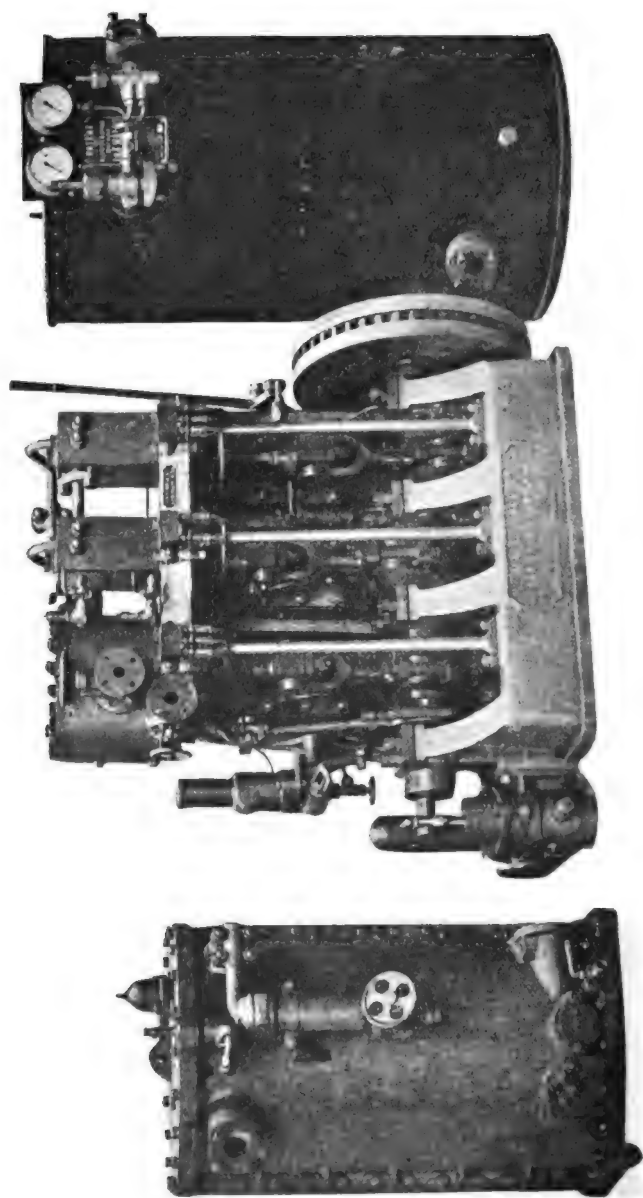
NAVAL-TYPE STEAM-DRIVEN MACHINE.
